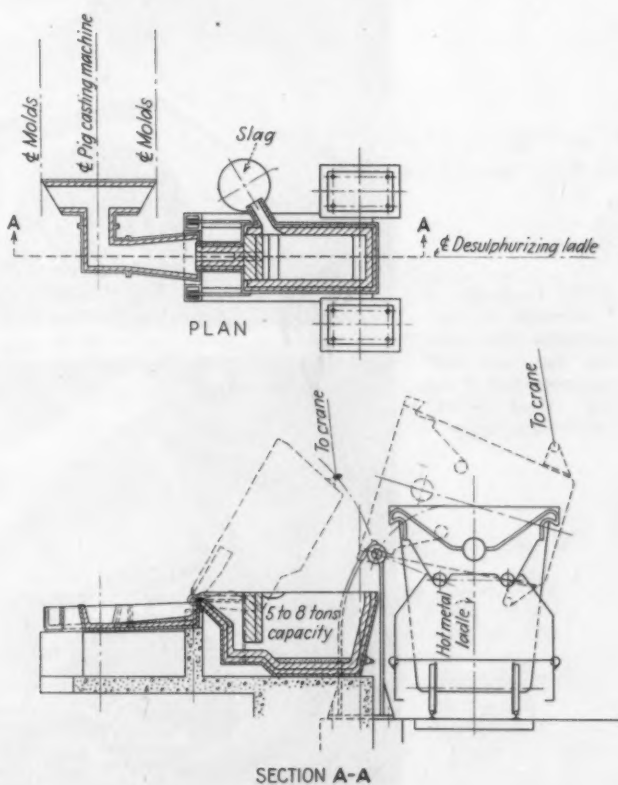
A desulphurizing unit adapted to a two-strand pig casting machine.
